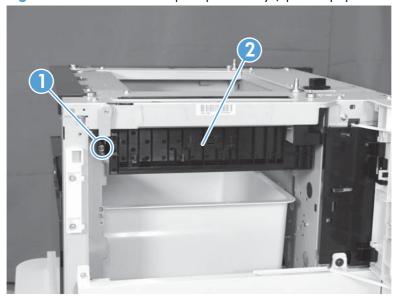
Remove the pickup assembly (optional paper feeder) (3 of 5)
